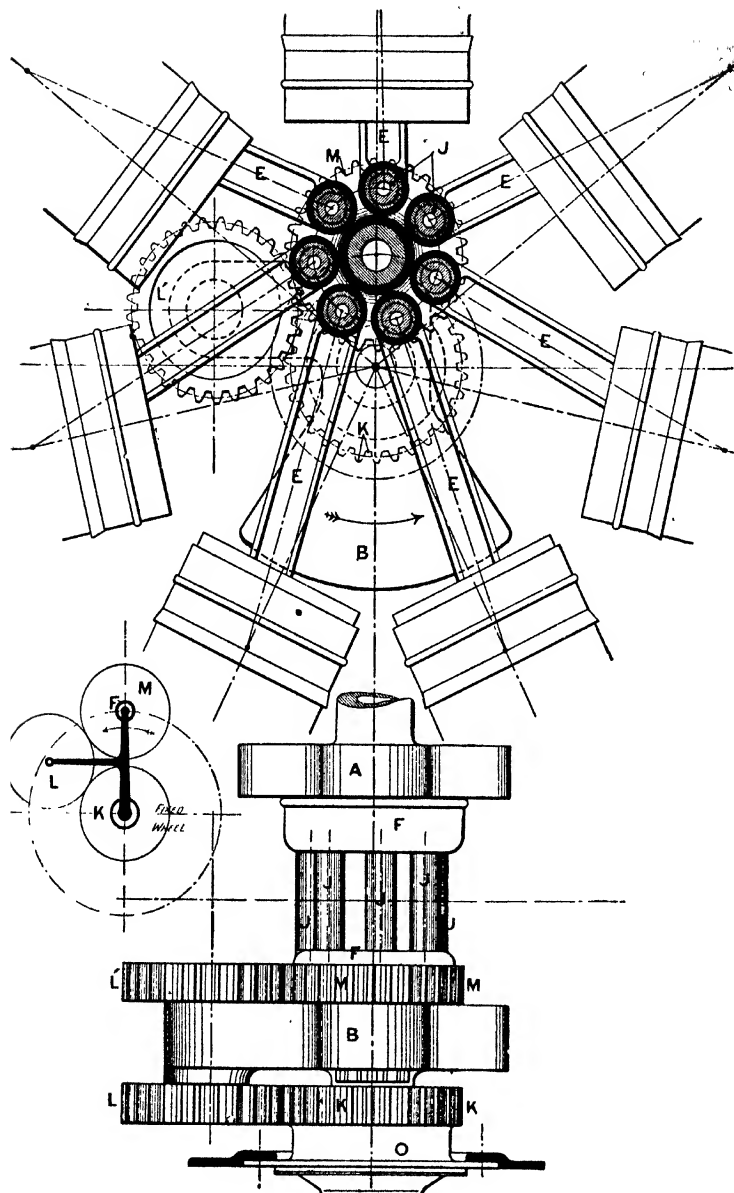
Diagram illustrating mode of attachment of connecting-rods to crank-pin in Salmson engine.
